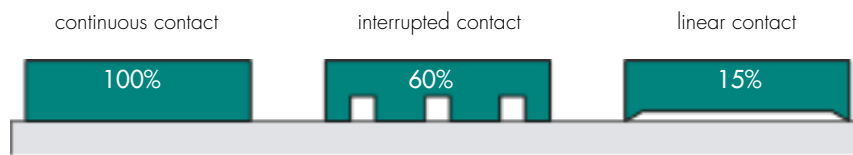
Rough illustration of holding force reduced by unfavourable workpiece shapes
